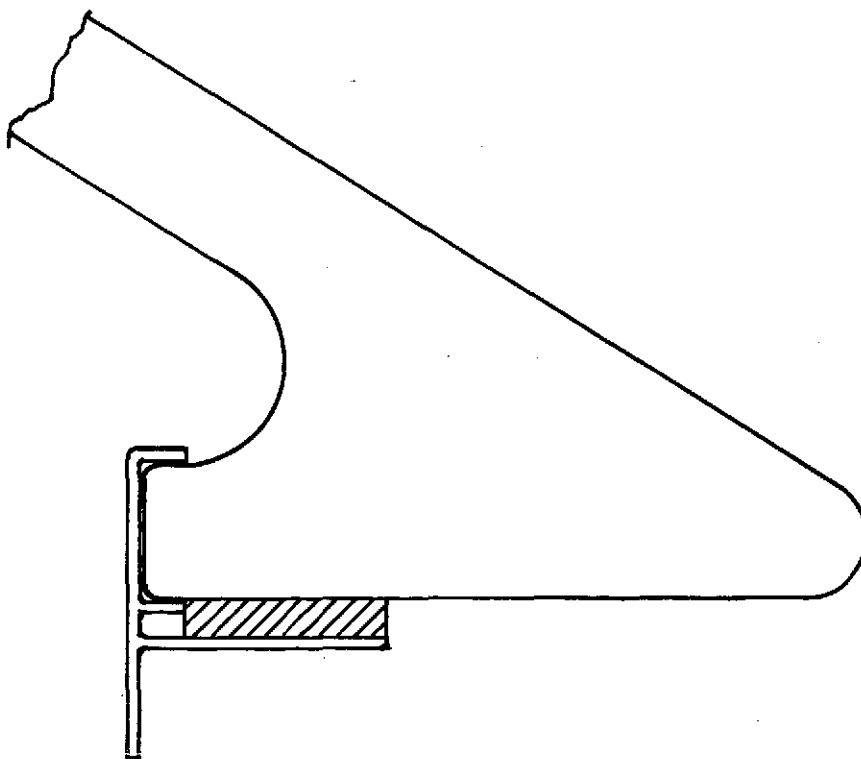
Bonded base ring attachment with secondary mechanical retainer
